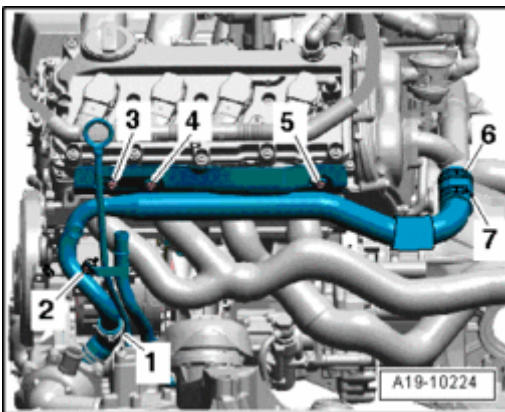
Removing Bolts, Oil Dipstick Guide Tube Upward, Bolts & Hose Clips
